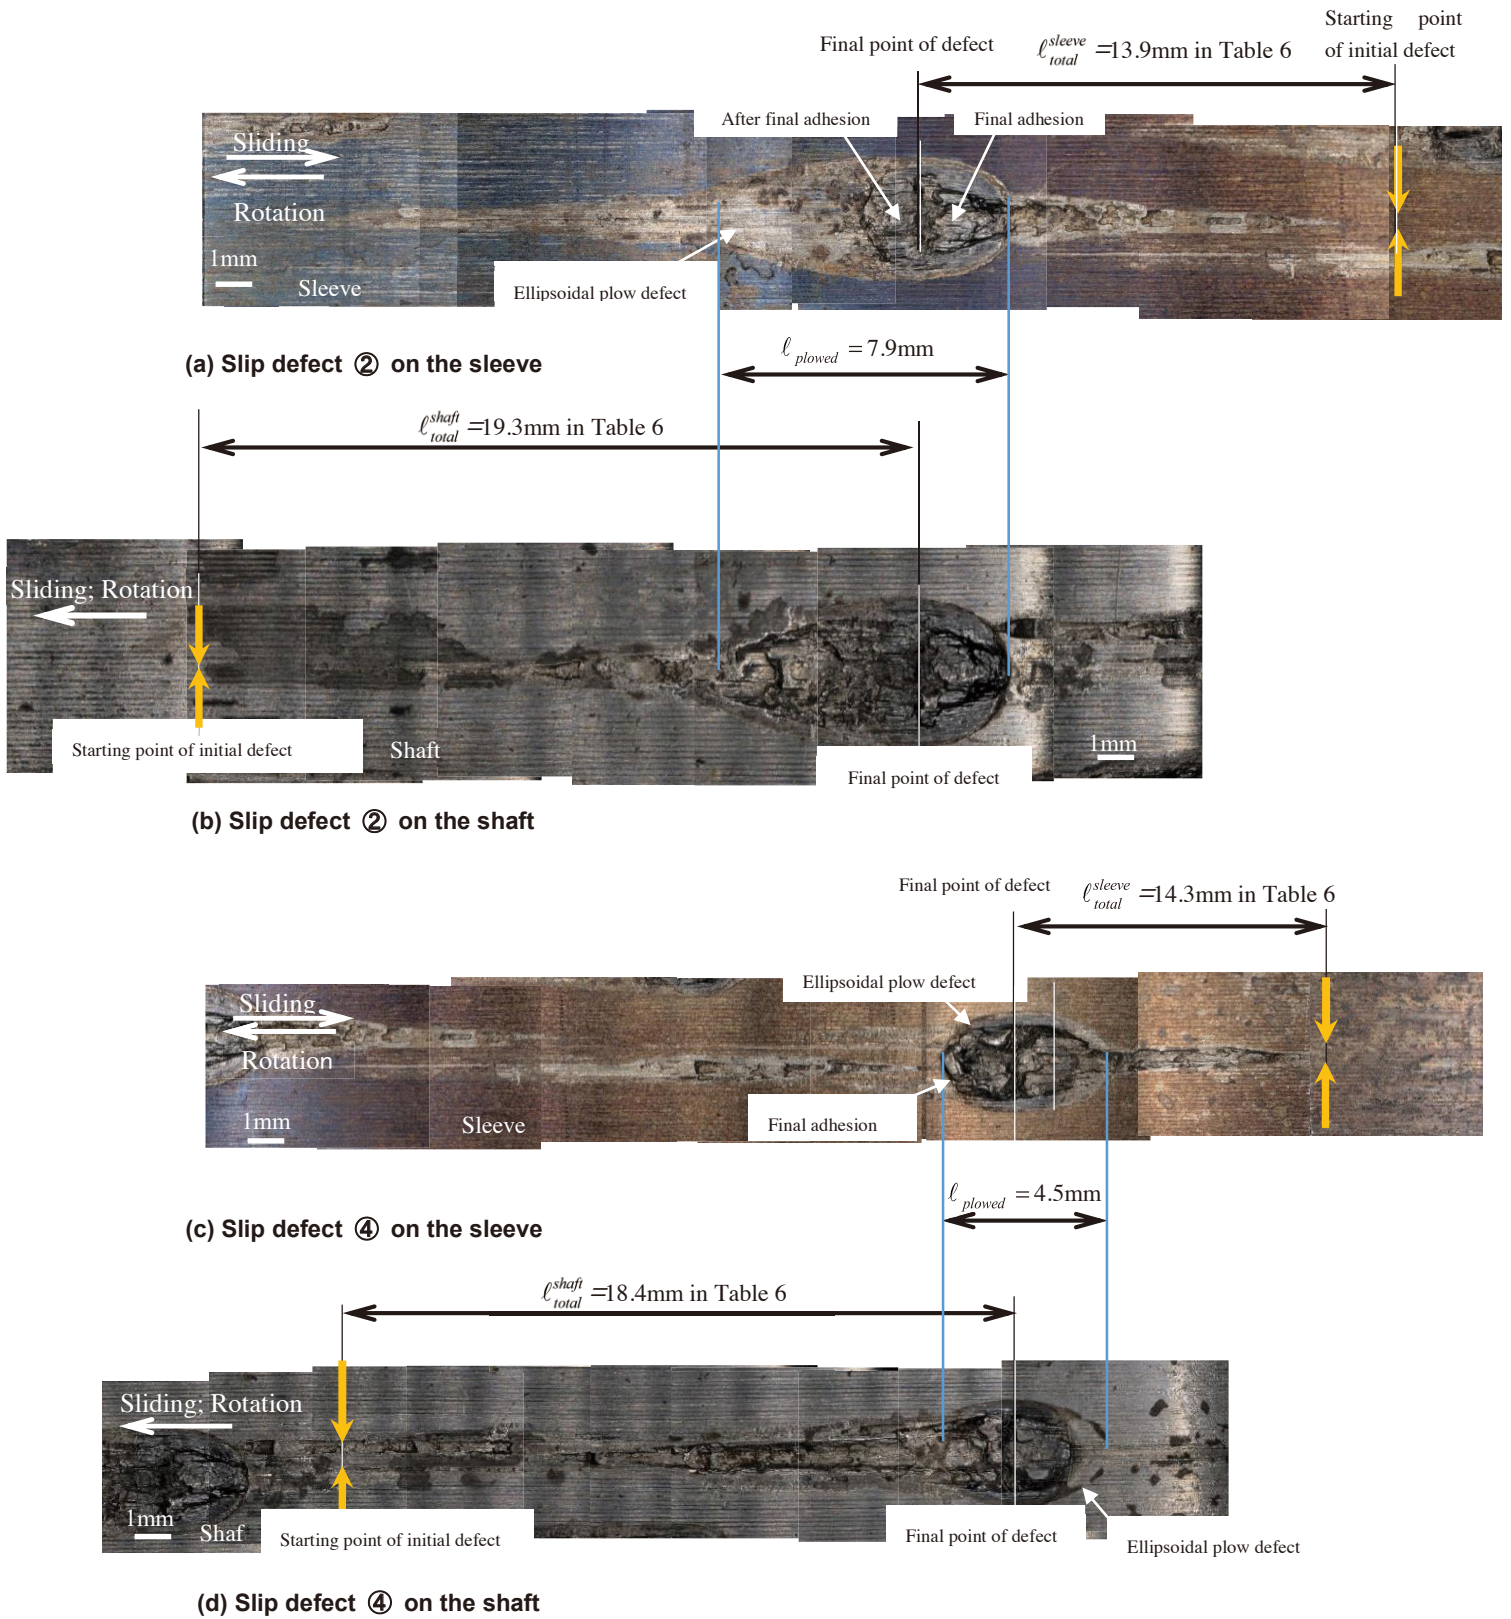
Slip defect ② and ④ on the sleeve and shaft
